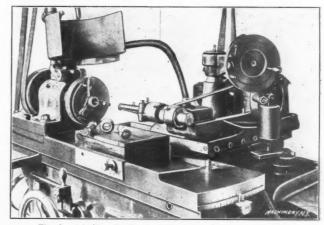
Grinding the Bore of the Cams Concentric with the Cylindrical Surface
